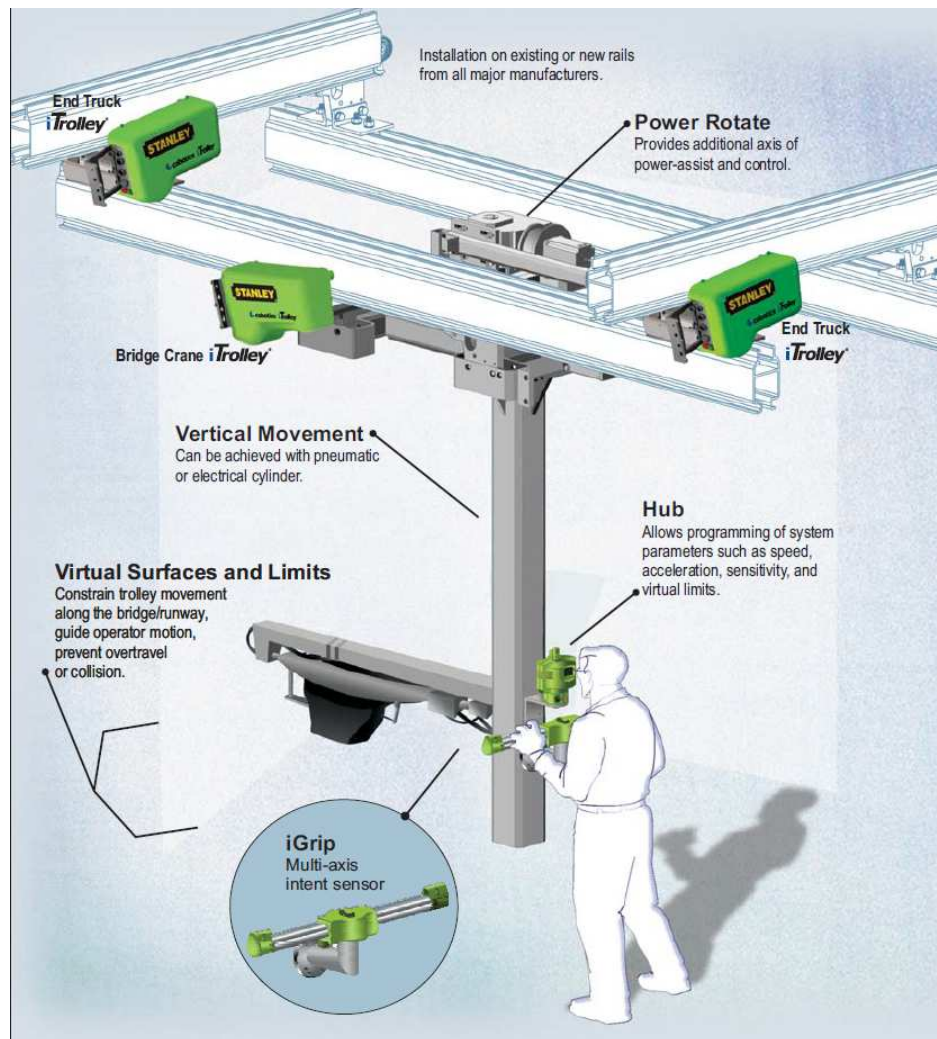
The *RailCobot* crane manufactured by Stanley Assembly. Image taken from the Stanley Assembly Cobotics Brochure [155]
